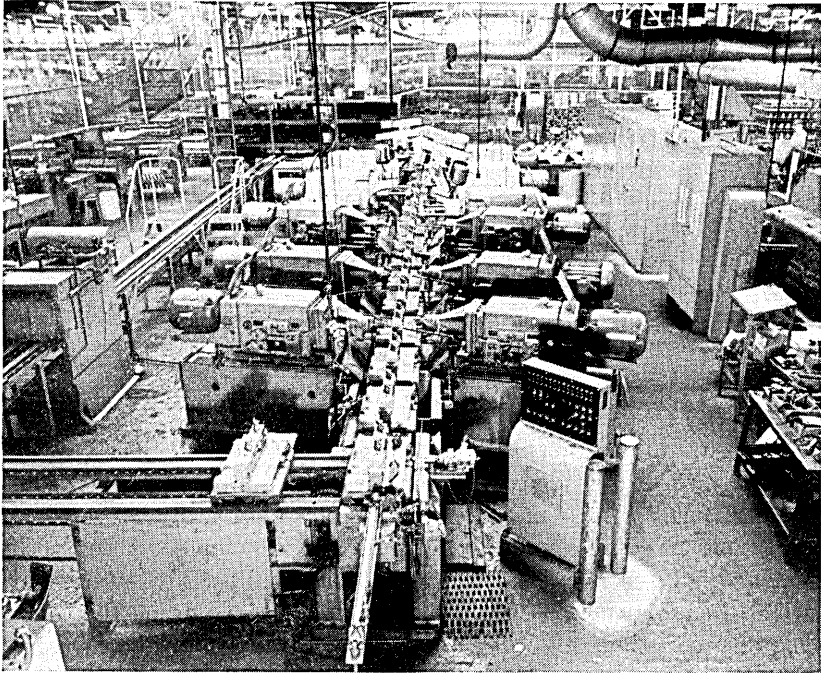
Typical transfer machine for automotive castings (Courtesy Modern Tool Works Ltd.)
